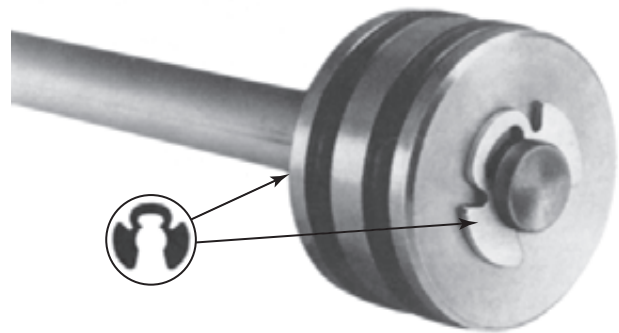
External retaining ring used on a shaft (TRUARC Company LLC).
